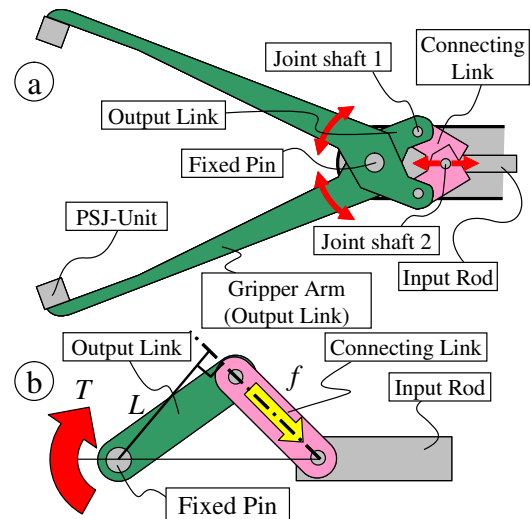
Gripper with a traditional linkage mechanism (Opening)
